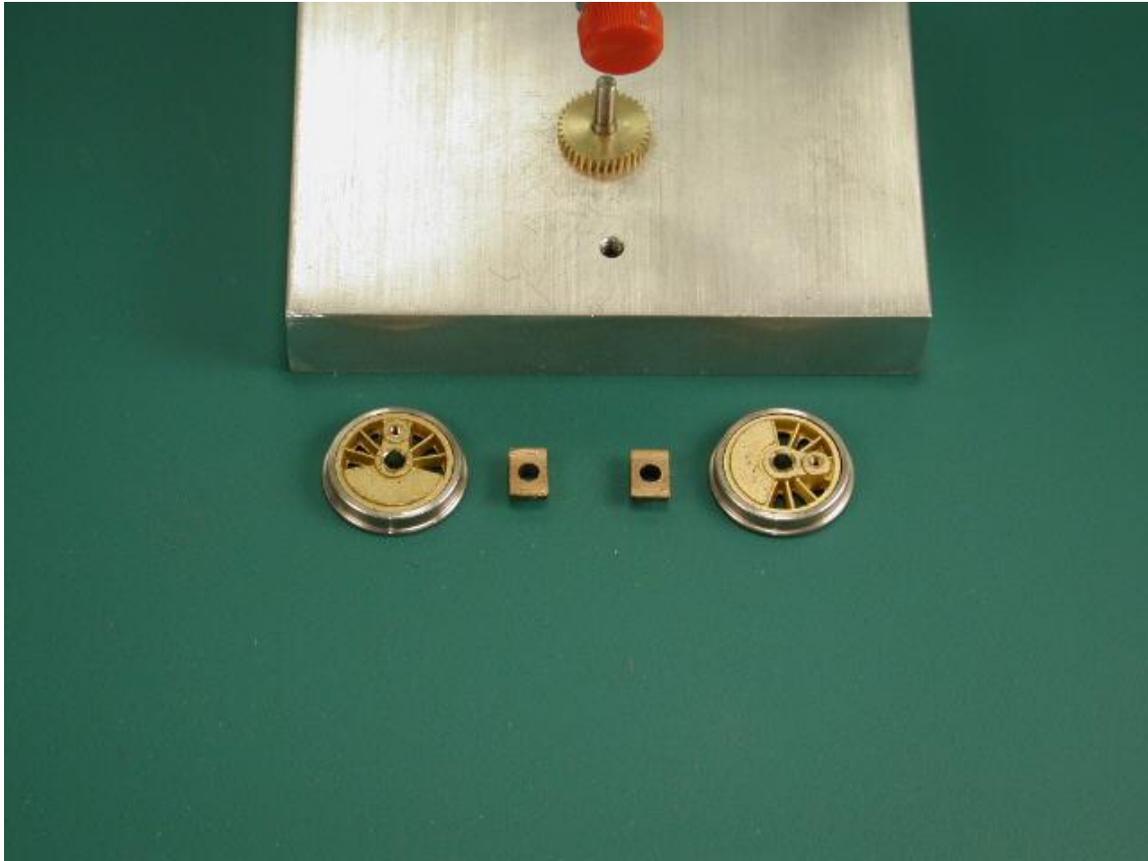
Using the NWSL Sensipress, the new gear is pressed to the exact center of the new axle, true and square.
